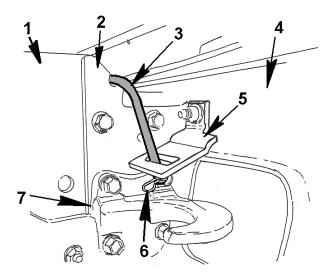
Torsion Bar Lower Bracket and Retaining Clip (Passenger Side Shown)
